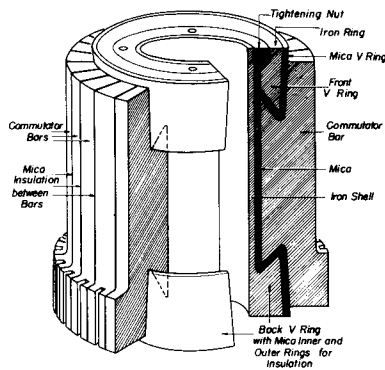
A commutator with a portion removed to show section and assembly.
